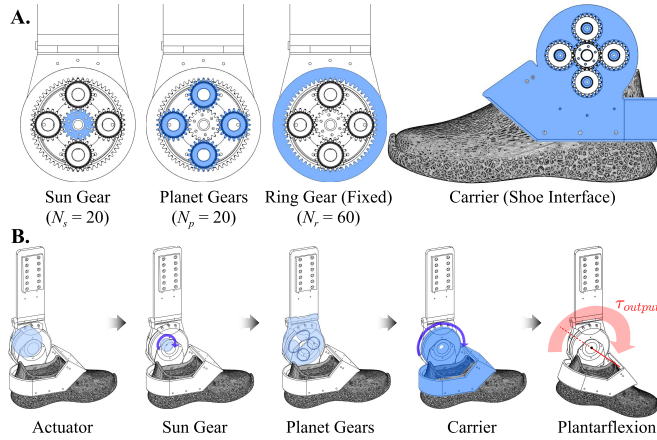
3D-printed planetary gearbox. (A) Components of the planetary gearbox used in PrintExo, consisting of the sun gear ($N_s = 20$), four planet gears ($N_p = 20$), and a fixed ring gear ($N_r = 60$). The carrier is rigidly coupled to the shoe interface and serves as the torque output stage. (B) Schematic illustration of power transmission, where actuator drives the sun gear, transmitting torque through the planet gears to the carrier and producing an assistive plantarflexion torque about the anatomical ankle joint.
